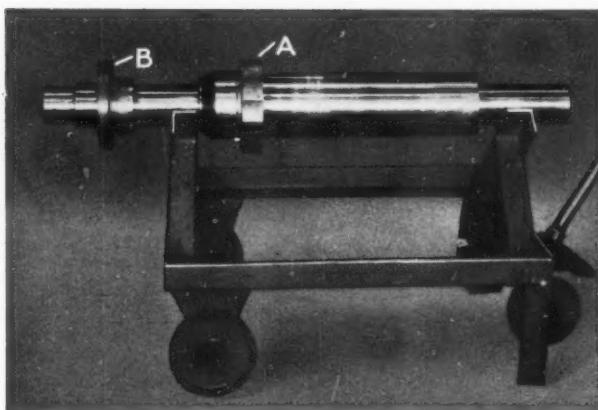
The Finish Machining Operations on the Spindle Drum are Carried Out with the Workpiece Mounted on a Slave Mandrel of the Type Here Shown
